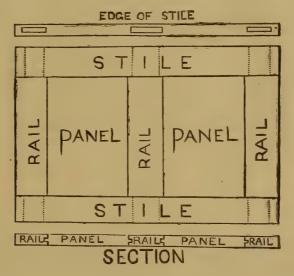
Carpenter's Tool Chest.—Sectional View.
